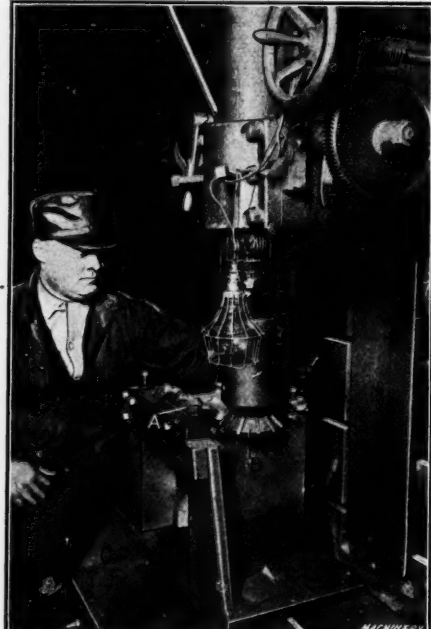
Machine shown in Fig. 6 for milling the Sliding Head of Drilling Machines
